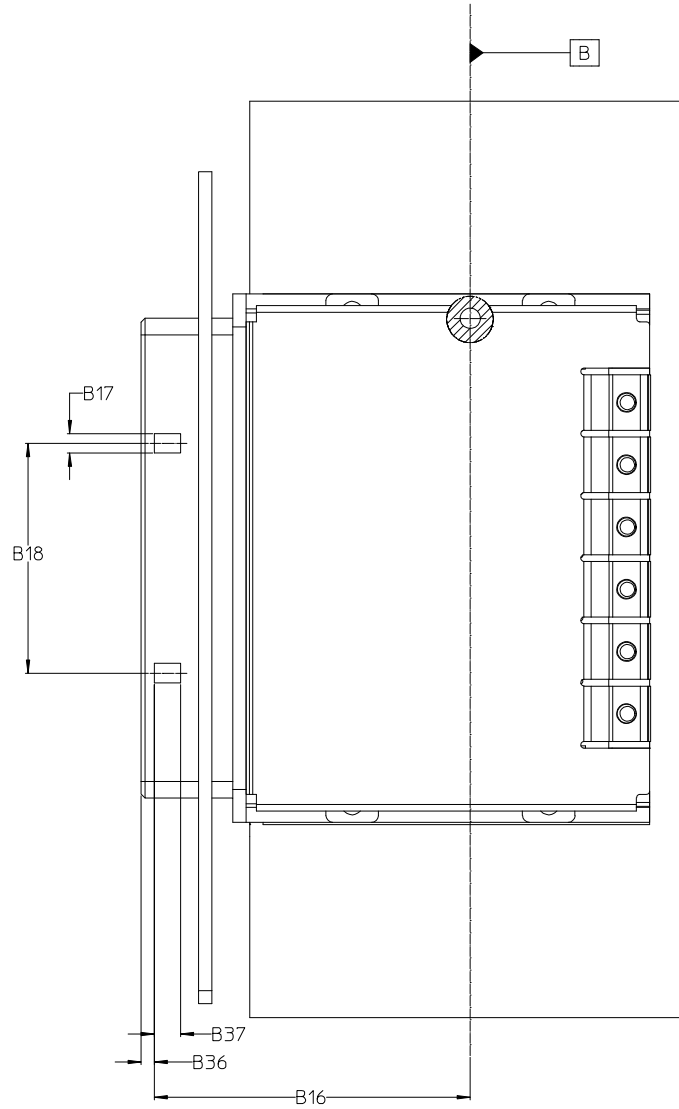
x8 EMI Guide Housing Assembly Top View
